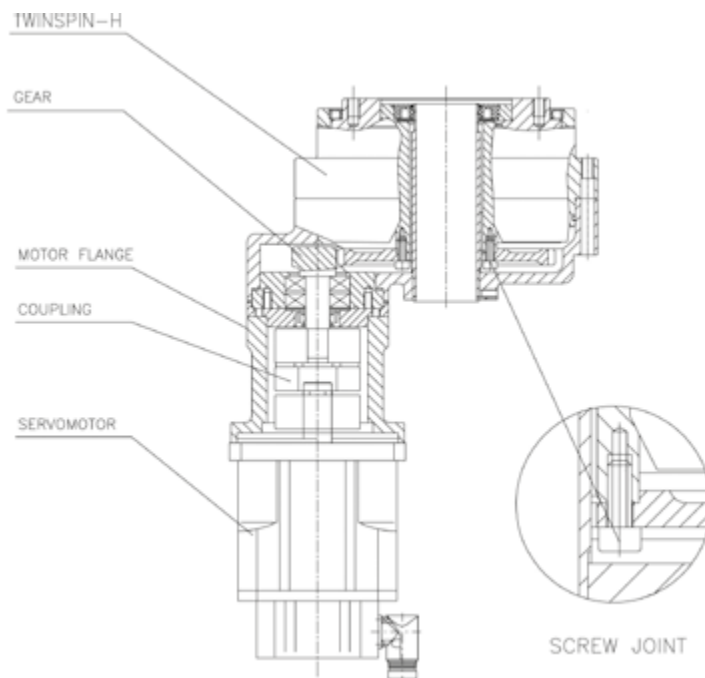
Connection of a gear wheel with the reduction gear shaft by means of a screw connection
